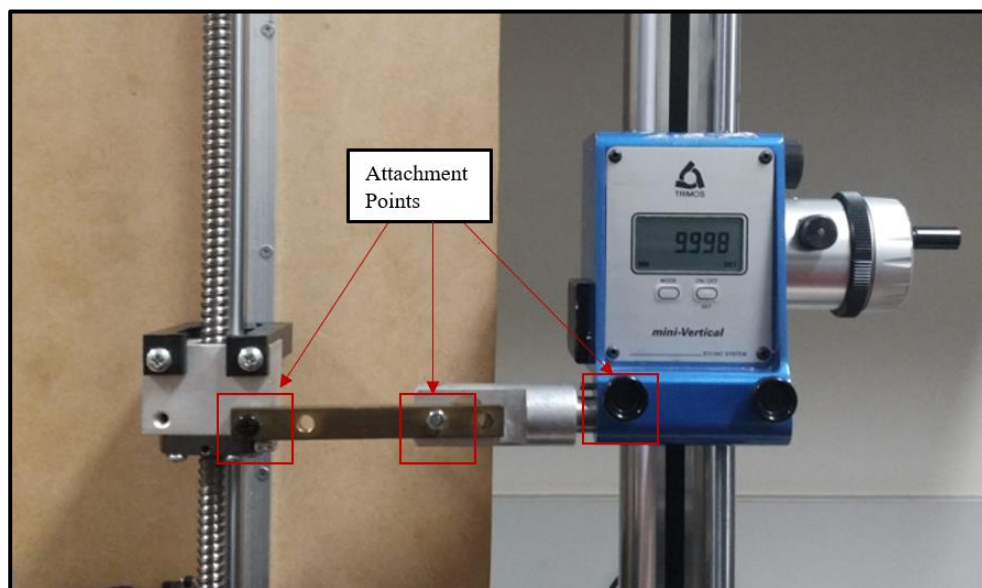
Annotated attachment points of the arm connecting the Trimos height gauge to the ball screw mounting block
